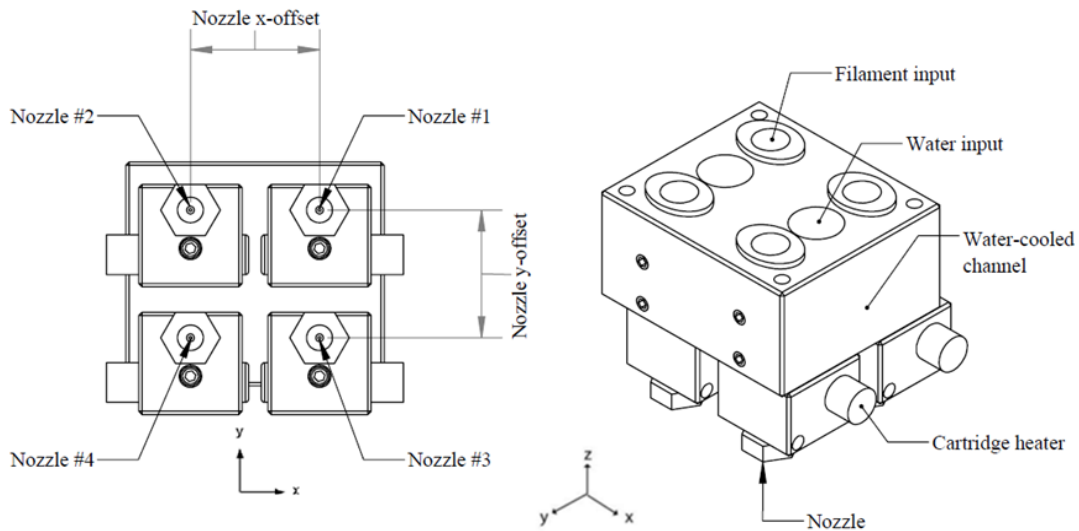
Illustration of the multi-nozzle module bottom side with the X-Y offsets (left) and isometric view (right)
